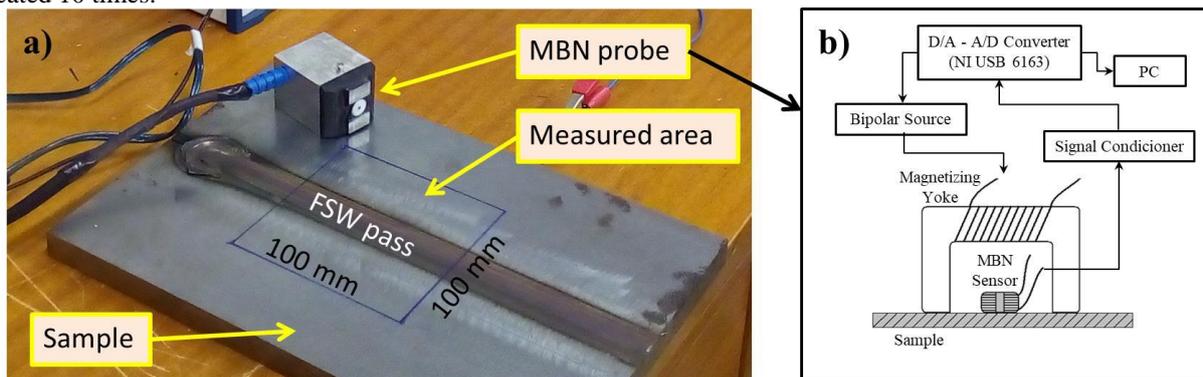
a) API 5L X80 steel plate FSWelded, sample region measured with MBN technique, 100 x 100 mm², and MBN probe; b) scheme of the MBN measurement system.
